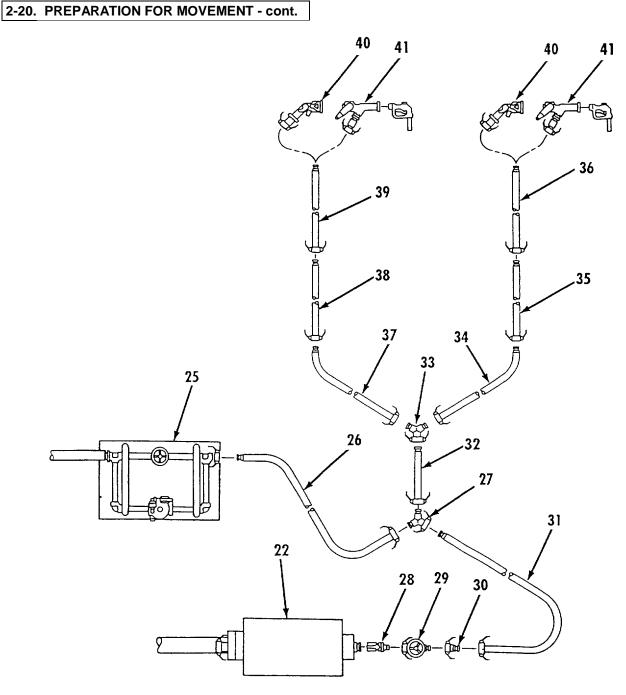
Fuel System Disassembly (Sheet 1 of 2)
